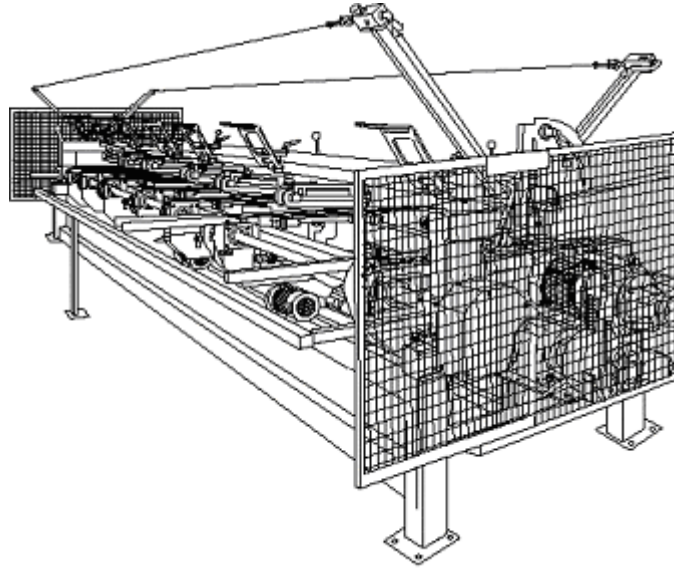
Example of multi-blade cross-cut sawing machine with integrated feed of the work-piece and manual loading and/or unloading (guards are not represented for clarity)
